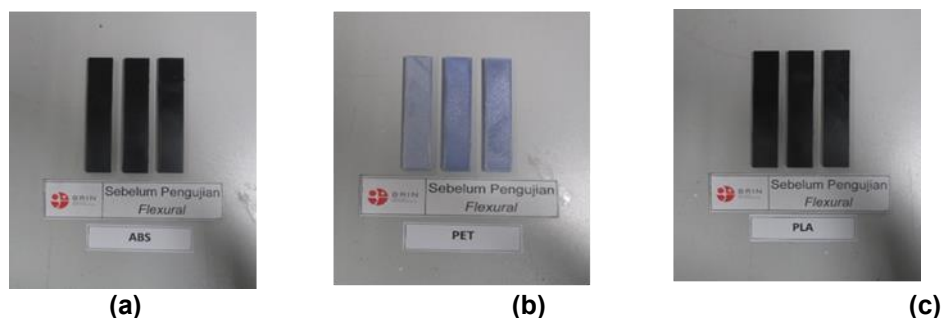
Bending Test Specimens: (a) ABS, (b) PET, (c) PLA
